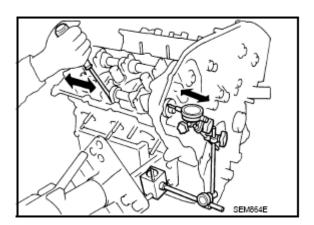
Measuring Camshaft End Play Using Dial Indicator
